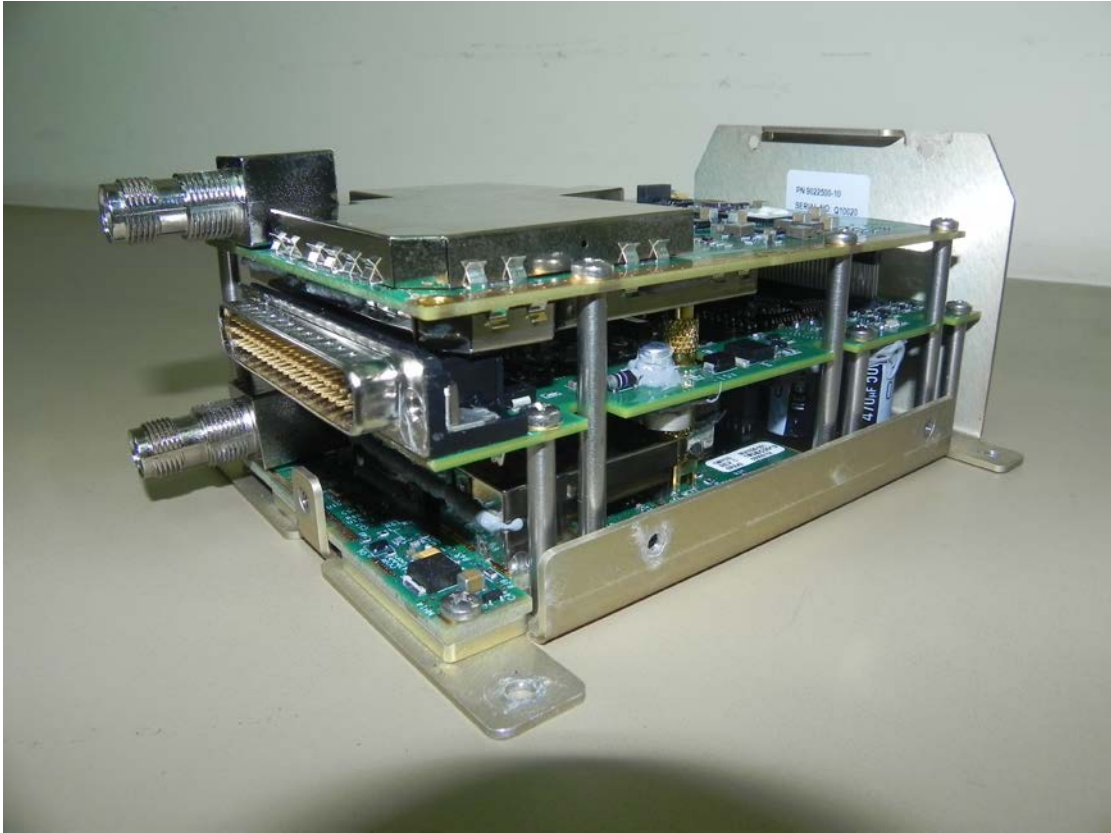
NGT-2500 Side View With Top Cover Removed
